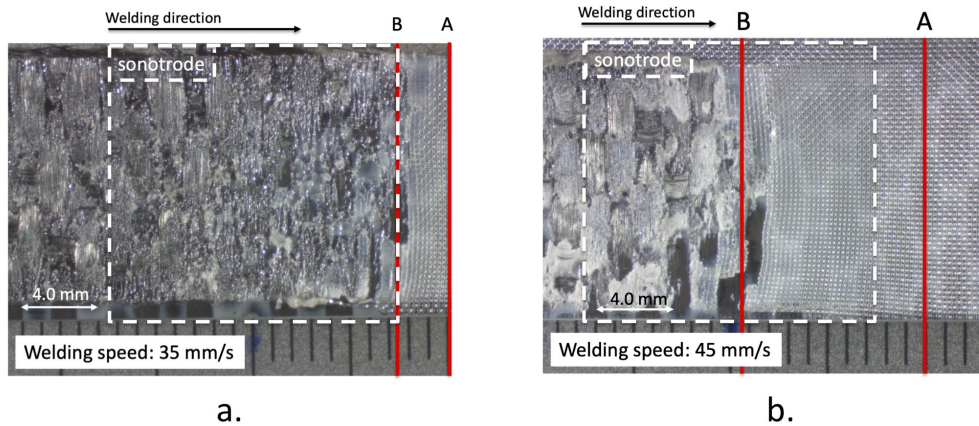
Representative partial fracture surfaces of two welds stopped during the welding process for (a.) a welding speed of 35 mm/s, welding force of 1500 N, a welding amplitude of 80 μm , and (b.) a welding speed of 45 mm/s, a welding force of 500 N, a welding amplitude of 80 μm . The white dashed rectangular box indicates the location where the sonotrode stopped.
